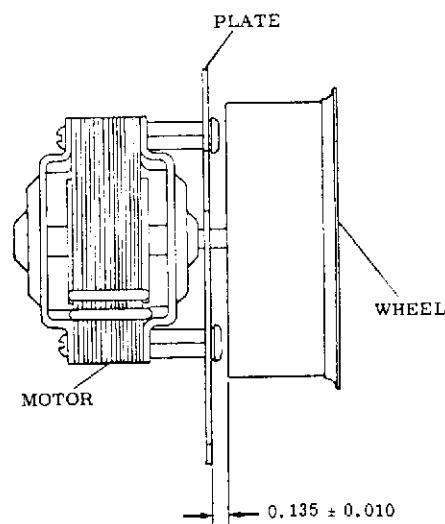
MOTOR MOUNTING PLATE ASSEMBLY.
